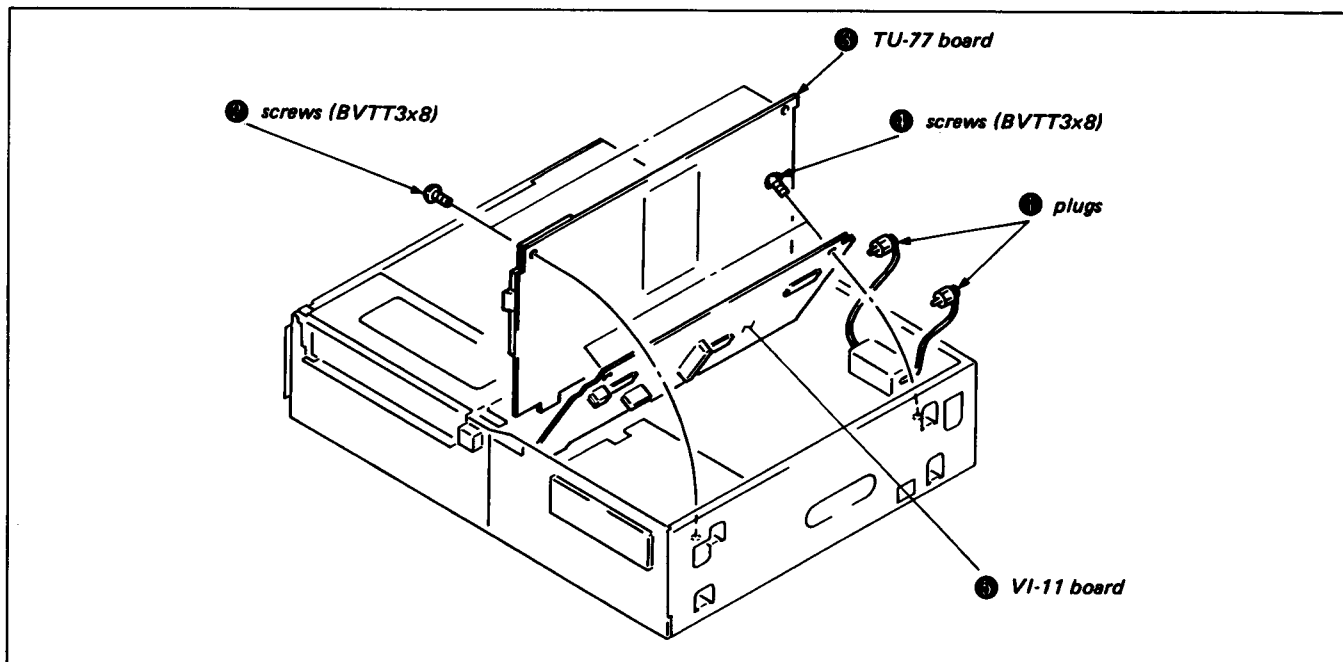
Removal of the TU-77 Board and VI-11 Board
